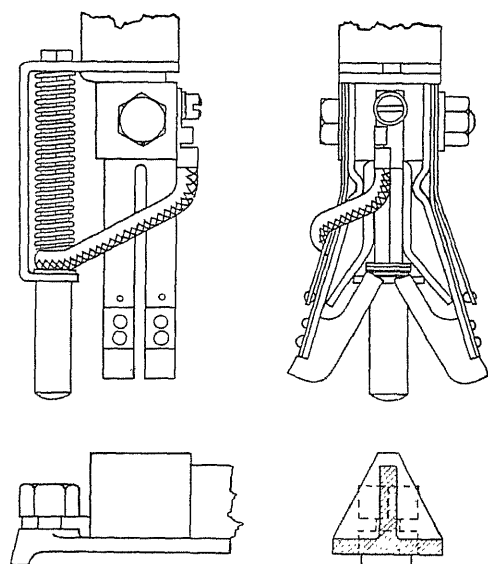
Controller Finger Main Contacts, with Butt Arcing Contact
